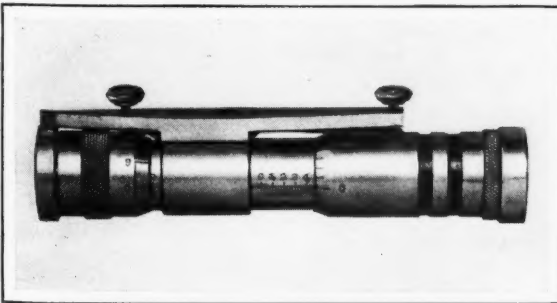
Micrometer Head Used for Locating on Reed-Prentice Jig Borer
